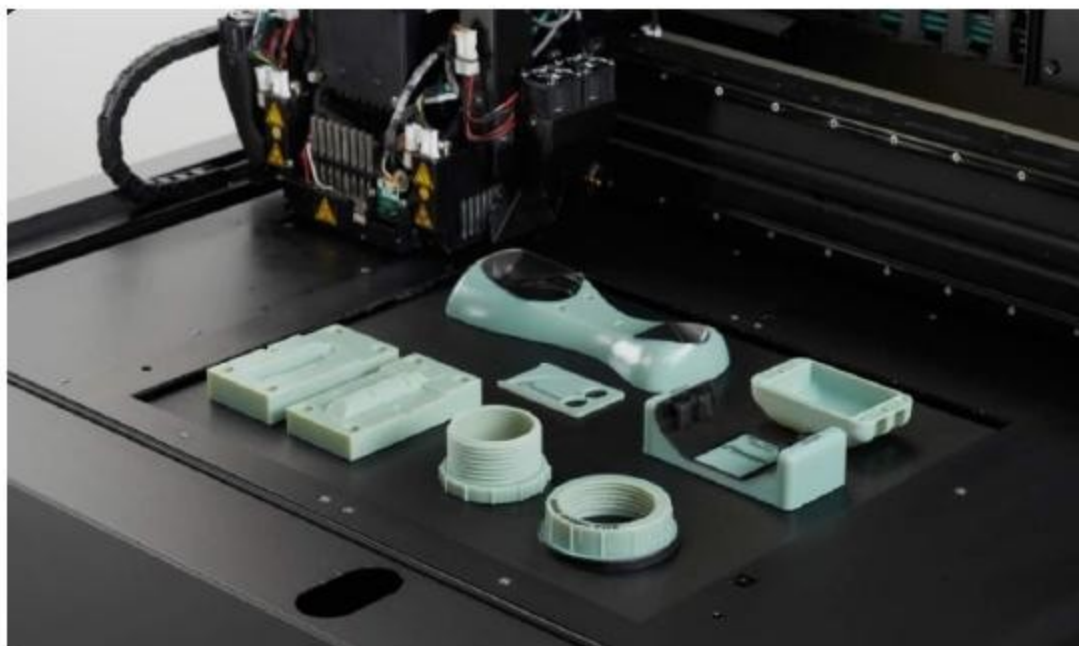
3D printer (Open 3D printer 3 (Professional April 6))
